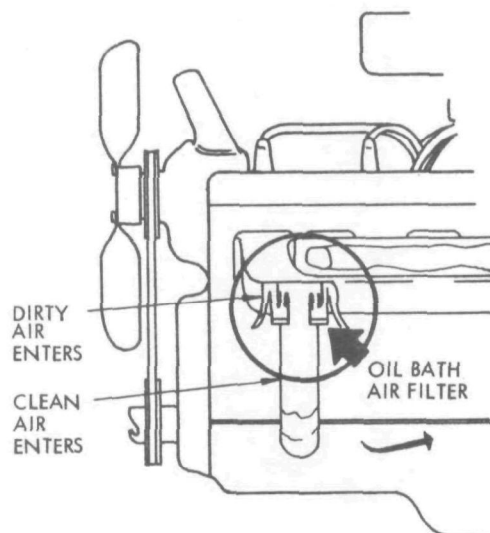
DEVICE 160 OIL-BATH TYPE AIR CLEANER
